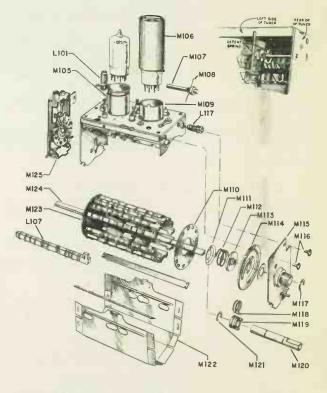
Exploded View of VHF Tuners 94E163-1 and -2. Partial illustration shows placement of detent spring and detent roller.
